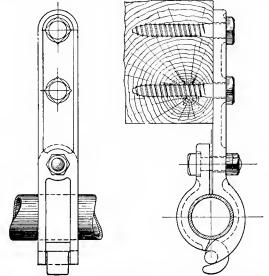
Acme Pipe Clamp for Side of Longitudinal Sill. Western Railway Equipment Company.
